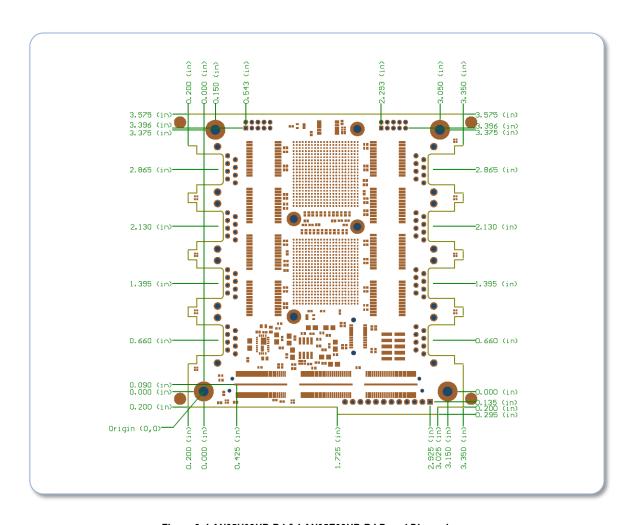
LAN35H08HR-RJ & LAN35E08HR-RJ Board Dimensions
